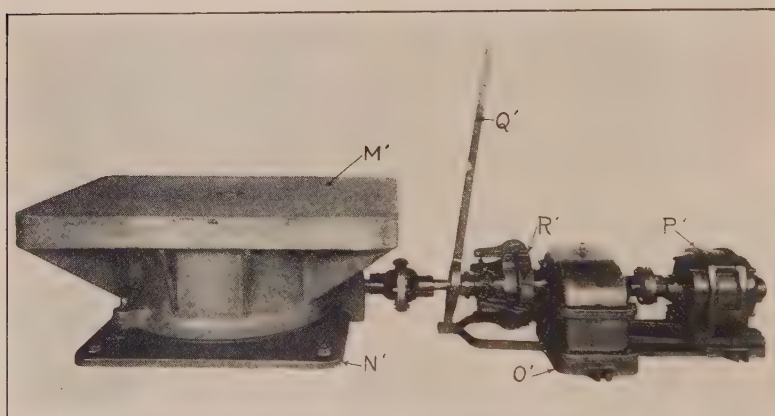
Pridmore's Cam Jolting Electrically-Operated Machine.
